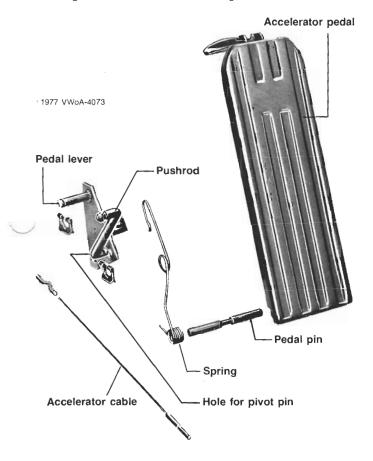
Exploded view of accelerator pedal assembly used on fuel injection vehicles.
